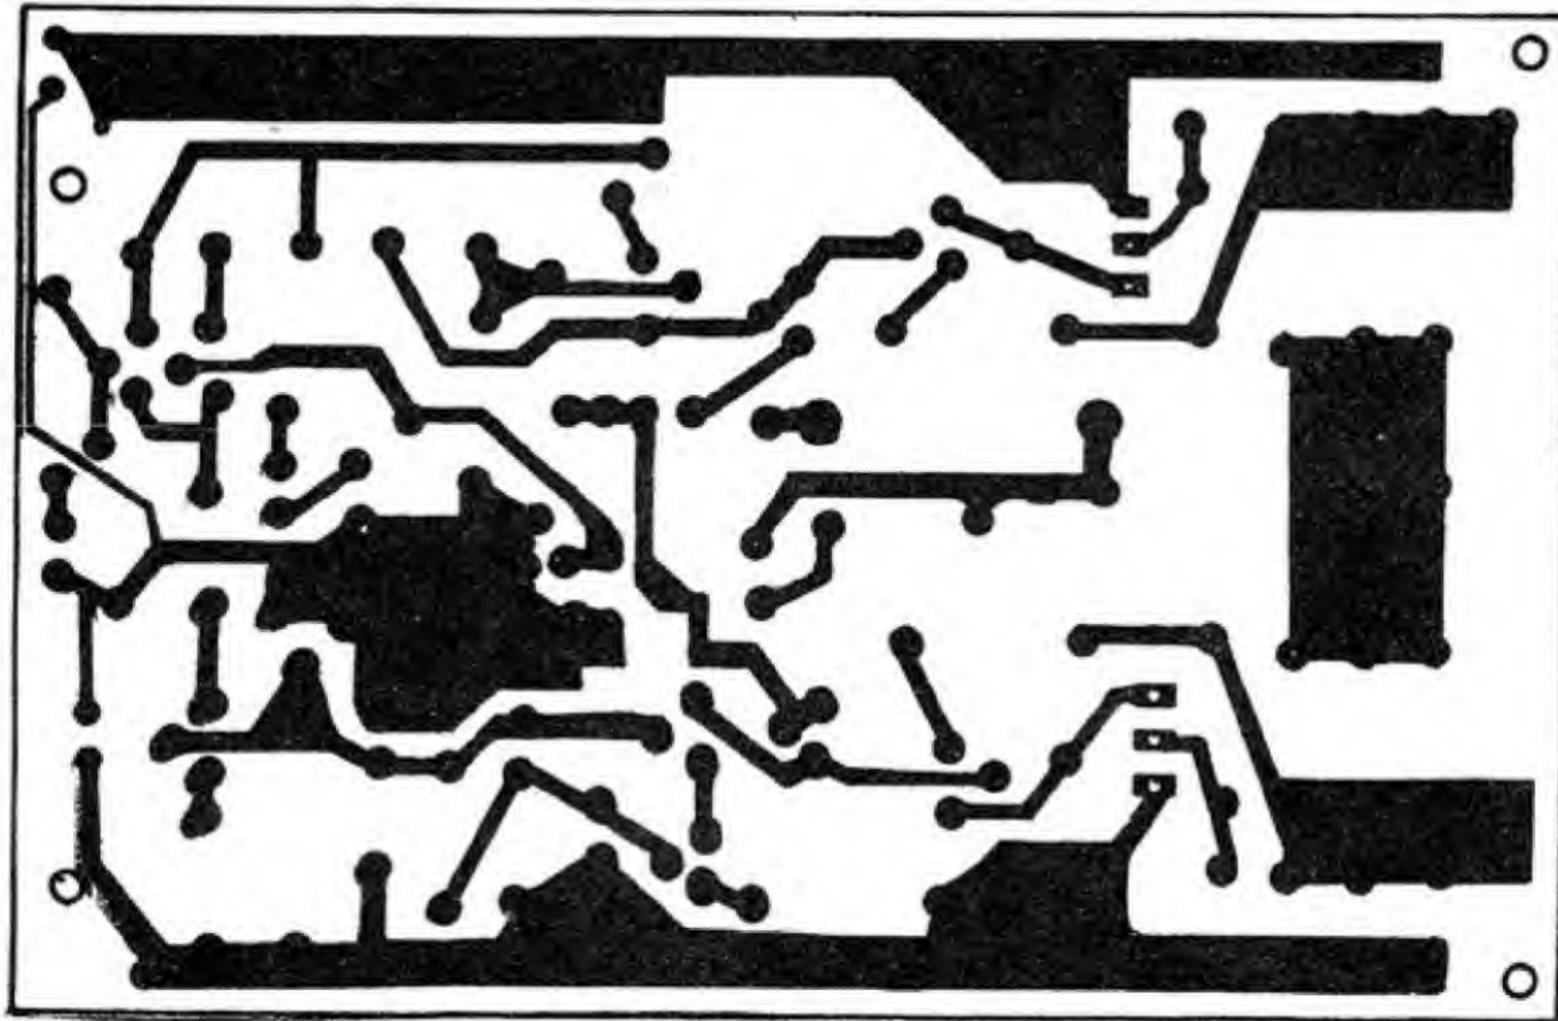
PCB layout for the circuit shown in Fig. 1.
